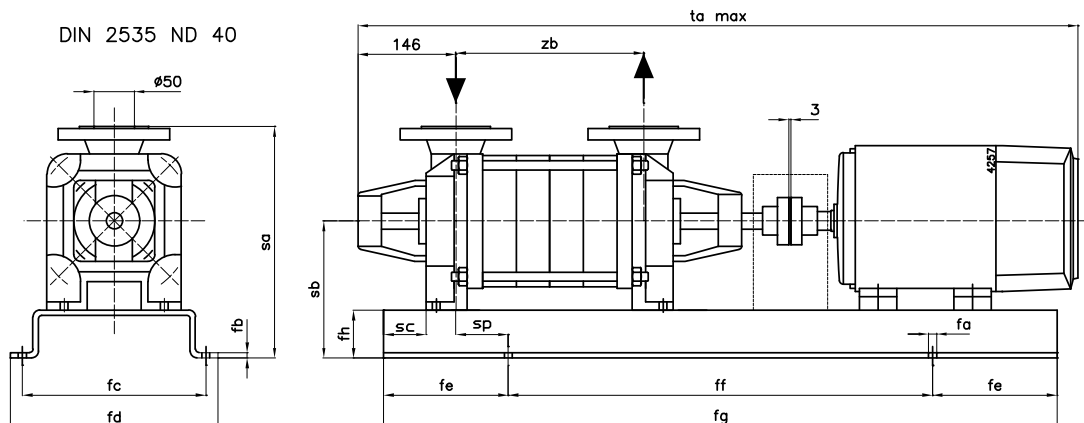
Dimensions sketch unit MCHZ(S) 14a.
